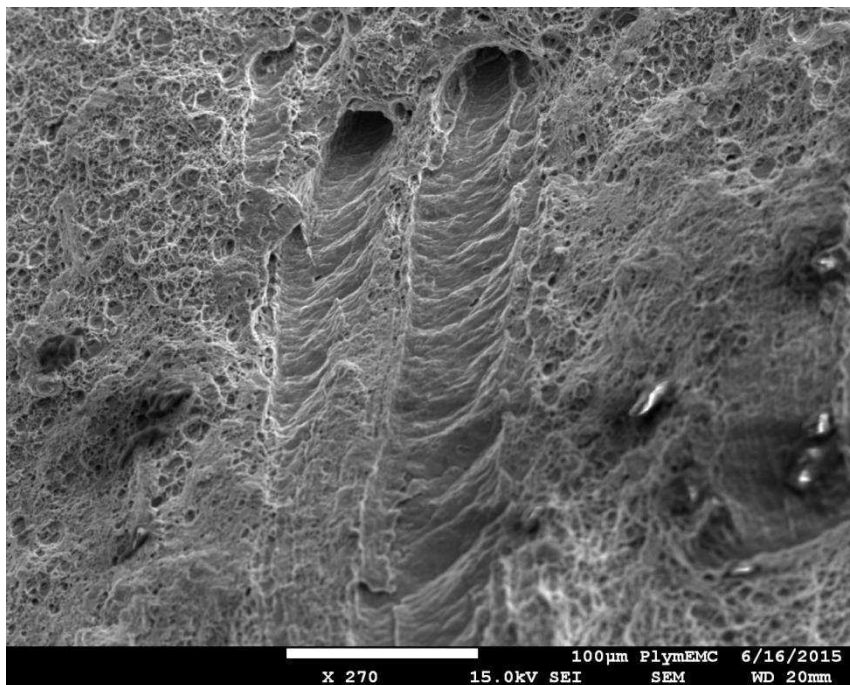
Wormhole defects on the fast fracture region of tensile fatigue specimen W117. As expected the fracture mechanism is microvoid coalescence.
